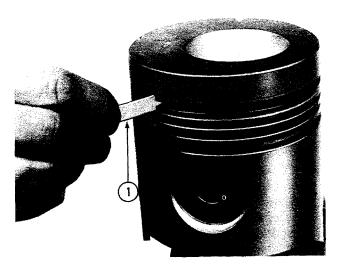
Checking Top Ring Groove 1. Keystone Gauge
